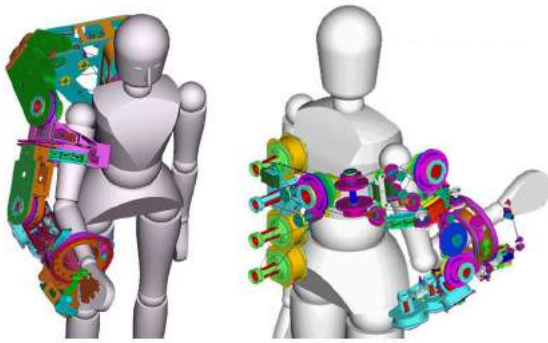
CAD model of the Arm exoskeleton II, with a view of the innovative transmission system
